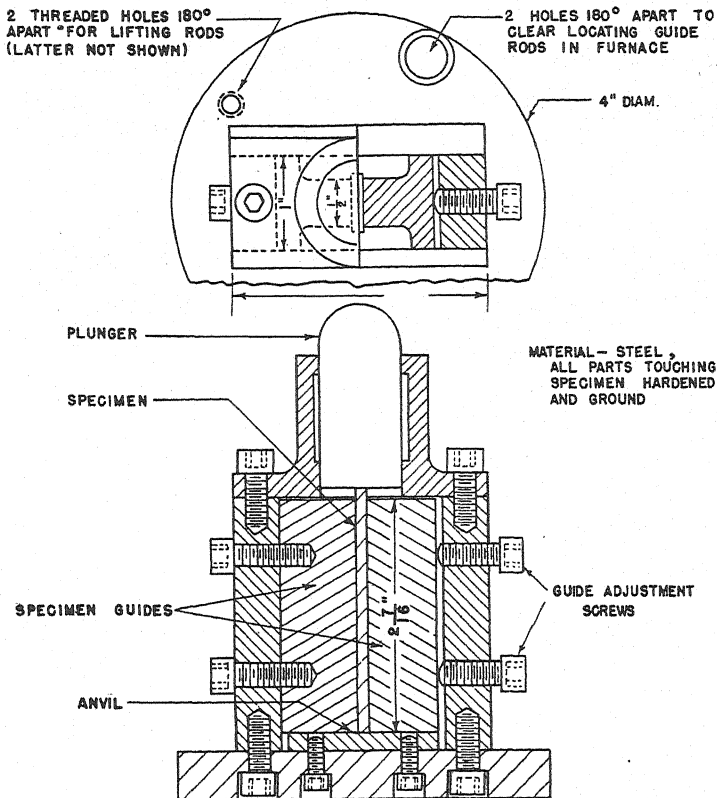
Schematic Drawing of Compression Testing Fixture.
